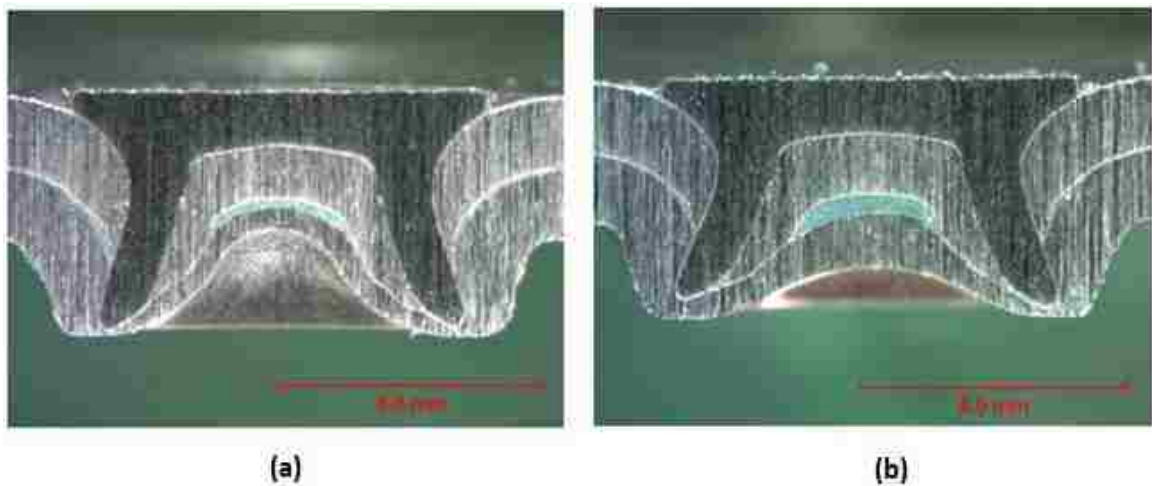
Riveted joint cross section; (a) $\text{Ø}5 \times 5$ rivet with DP09-175 die (used for 1.3 mm stack), (b) $\text{Ø}5 \times 6$ rivet with DZ09-025 die (used for 1.75 mm stack) [Source: Henrob].
